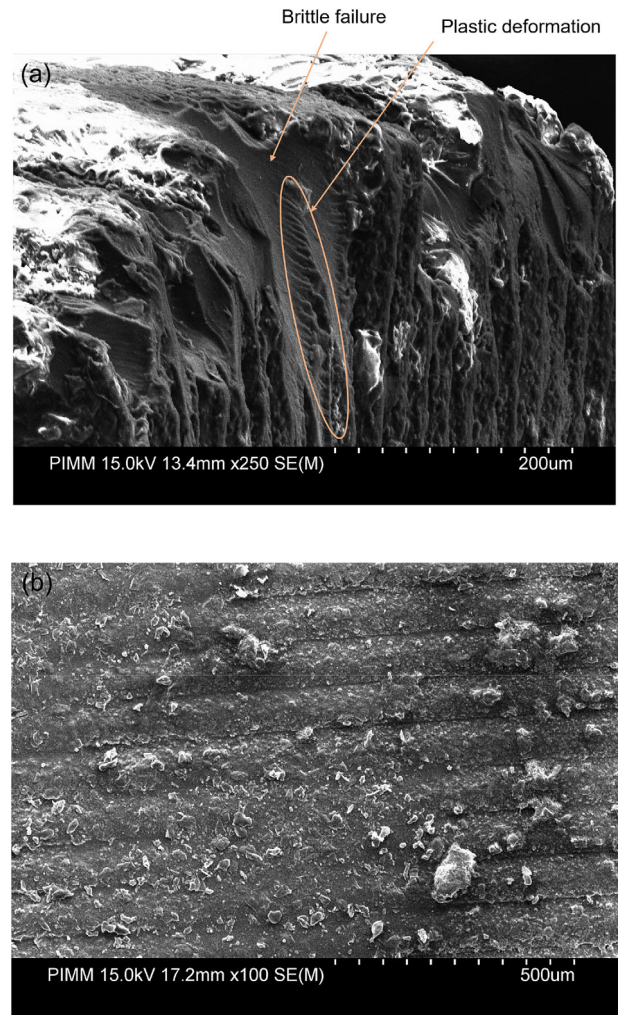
Fracture surface of 0° printed sample and post-cured at 60°C with respect to the (a) more magnification and (b) lower magnification [Color figure can be viewed at [wileyonlinelibrary.com](http://wileyonlinelibrary.com)]
